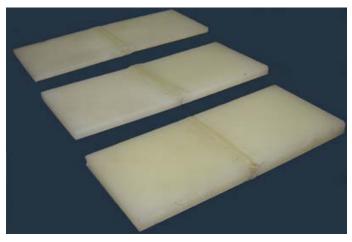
Exemplary welded joints made of thermoplastics prepared for a visual test [2]
